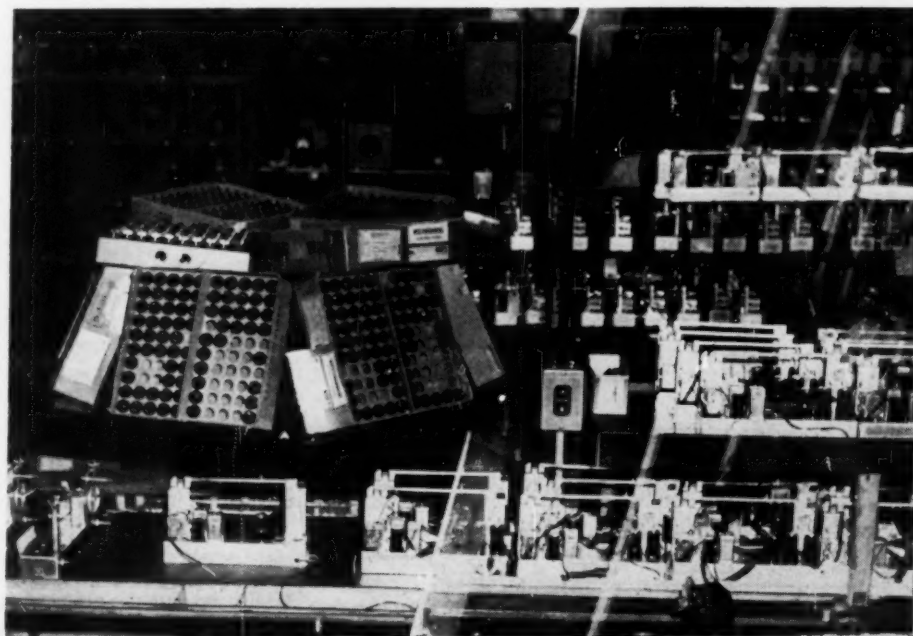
TURNTABLE ARRANGEMENT FOR STOCK OF TUBES IN CARTONS FROM WHICH OPERATOR CAN SUPPLY RADIO CHASSIS AS IT PASSES ON ASSEMBLY TRACK
